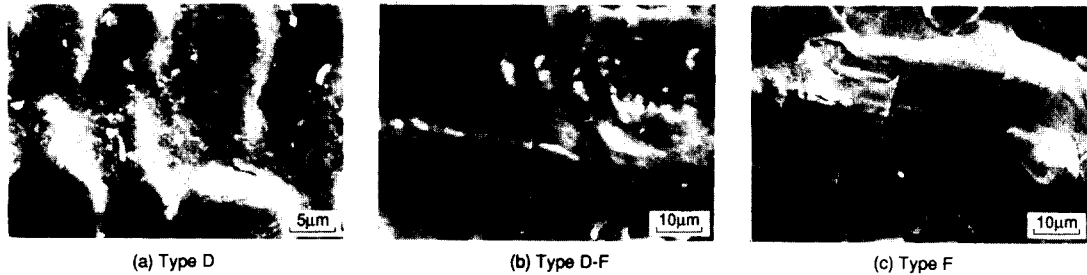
Typical microfractographs of type D, D-F and F in solidification crack of DS100 weld metal
